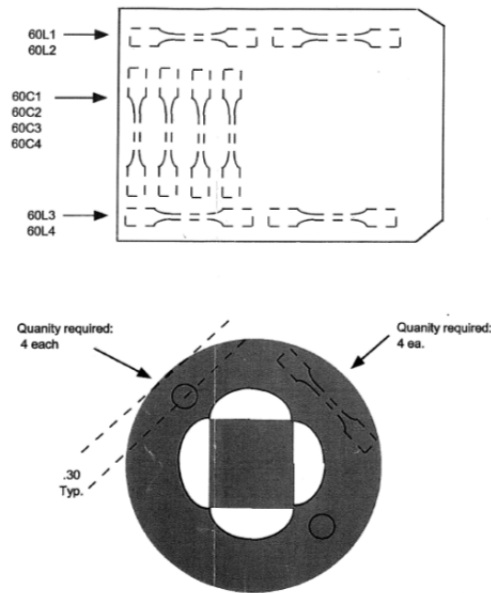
Type 304L Cylindrical Block Forging and As-Cut Fracture Toughness Specimens.
